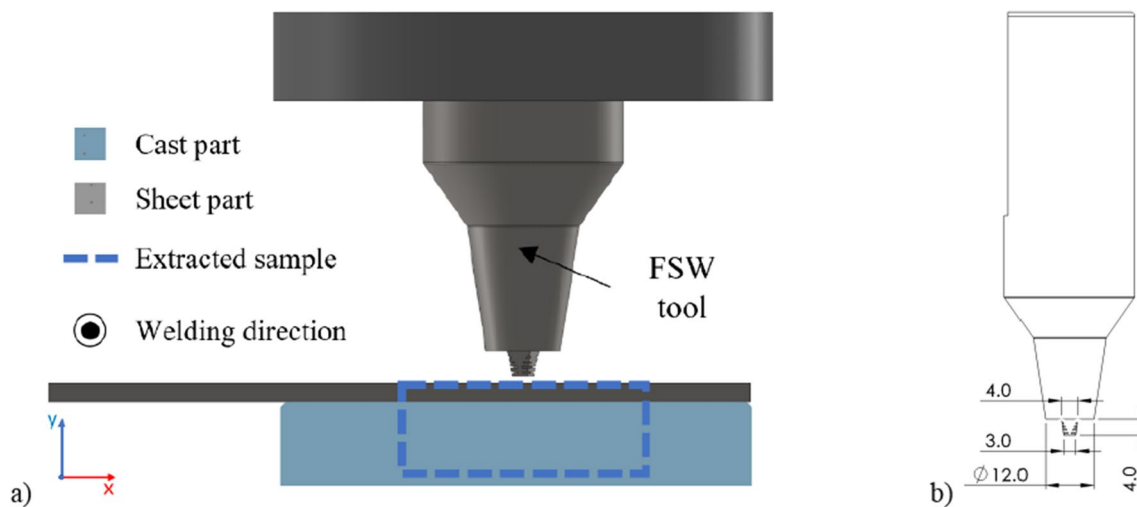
FSW experimental campaign: a welding setup and b tool geometry (dimensions in [mm])
